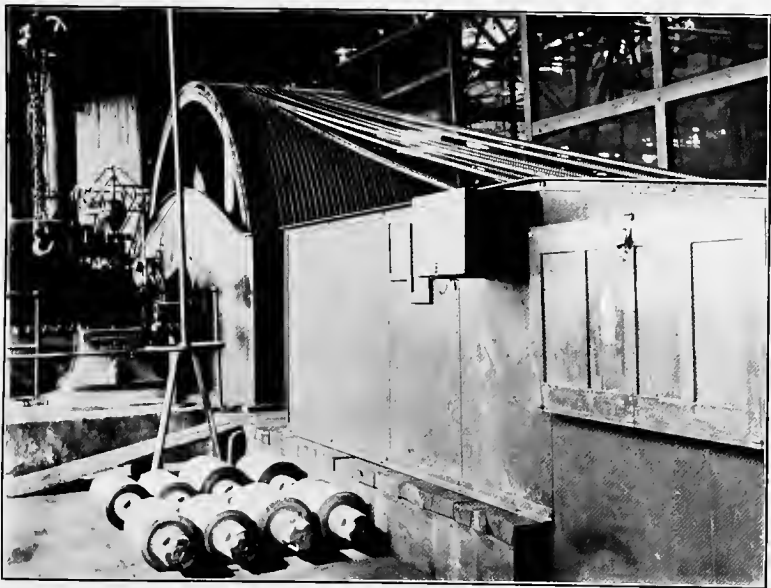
VIEW OF ROPE DRIVE FOR ROD MILL, SHOWING STEEL PLATE ENCLOSURE
